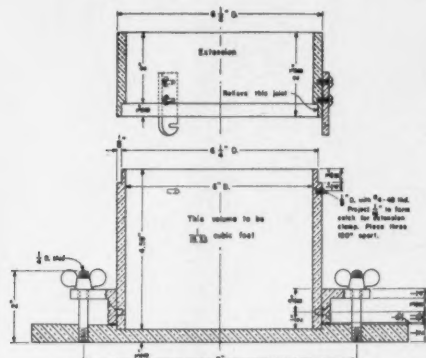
Cylindrical Mold, 6.0-in., for Soil Tests.
